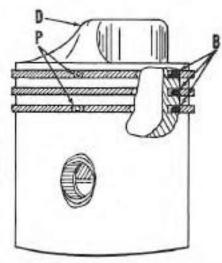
Cross sectional view of Fleet Scott piston showing two of the three piston ring locating pins (P). The other pin is in opposite side of piston, Rings are installed with beveled inner edge (B) to the top. Deflector (D) directs the flow of incoming fuel charge for proper scavenging. Fishing Scott pistons are similar except that locating pins (P) for the two rings are located in opposite sides of piston.
